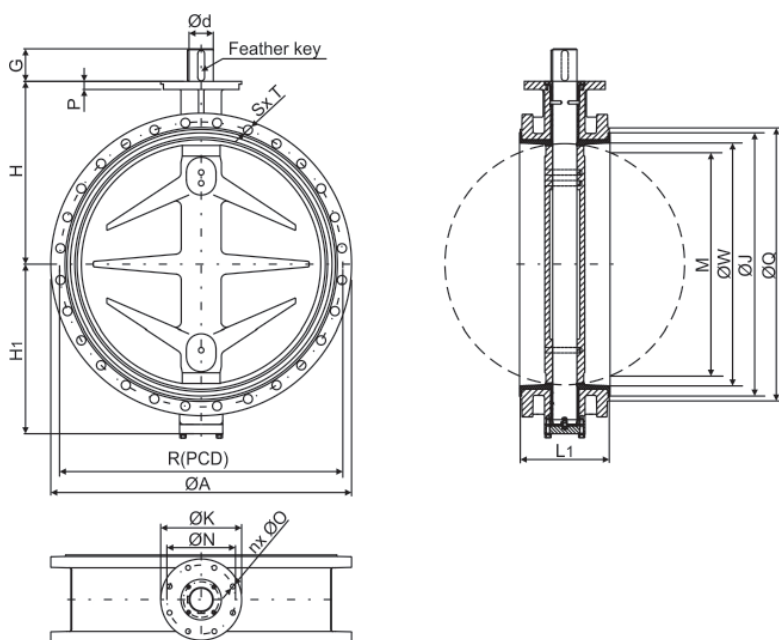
Double-flanged valve DN 700 to DN 1200 and NPS28 to NPS48
